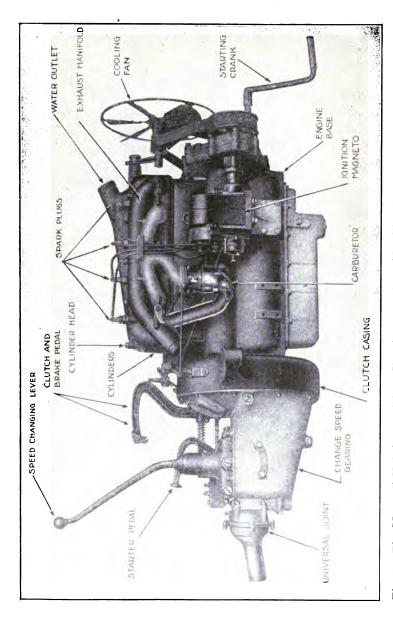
The Maxwell Unit Power Plant, Showing Location of Ignition Magneto and Carburetor, as Well as Change Speed Gearing Combined With Engine.
